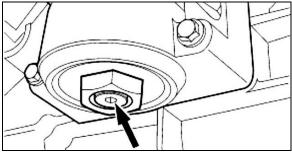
OIL FILTER HOUSING DRAIN PLUG
